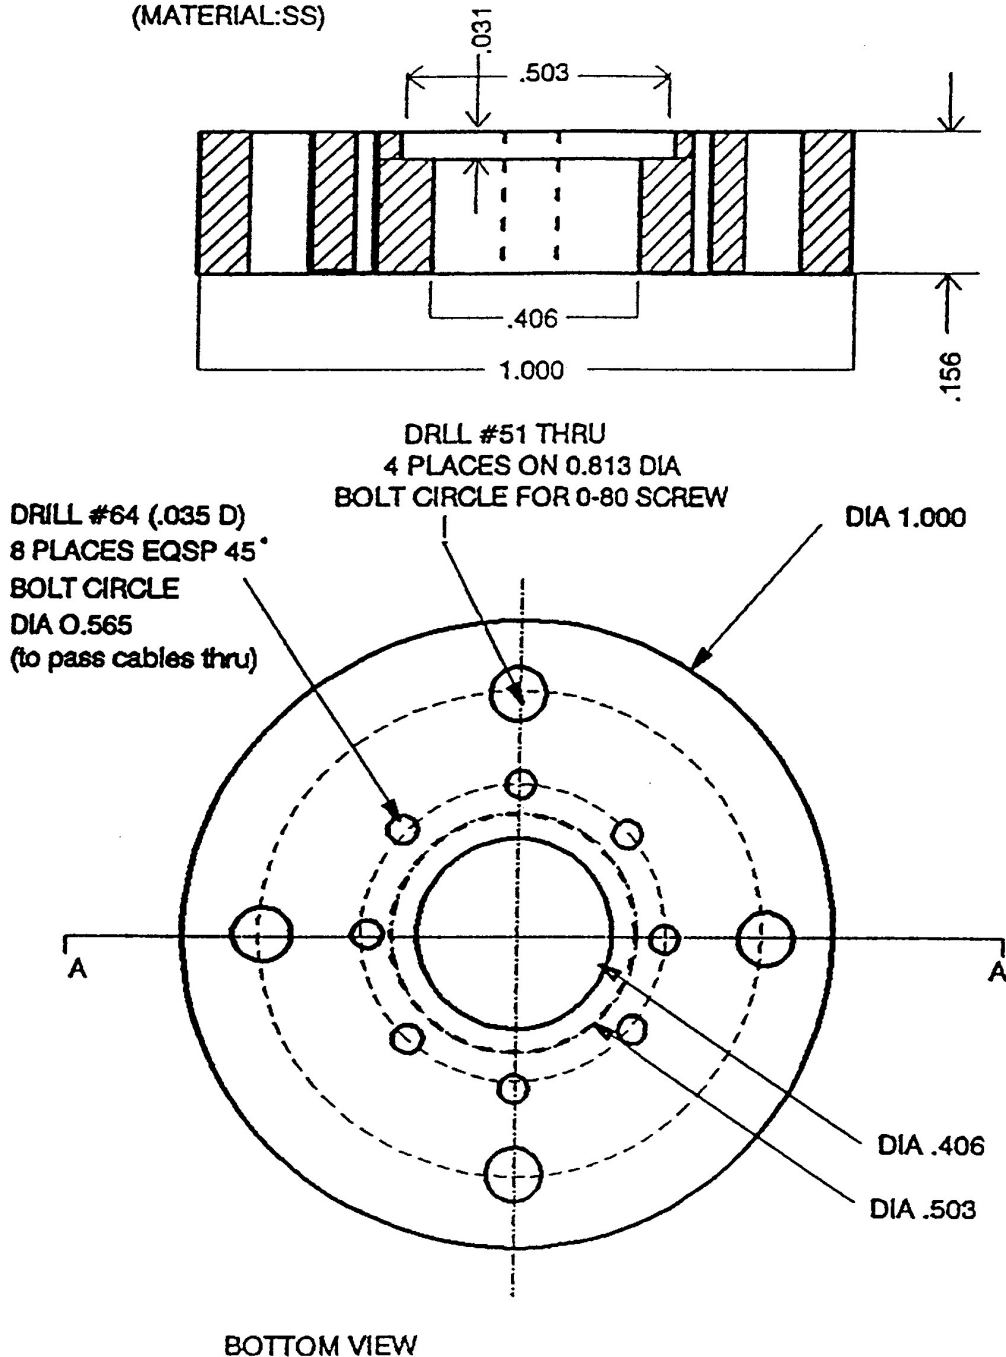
Scan piezo mounting (bottom) flange, number (I) in Figure B.3. This is the base plate for the piezo, which is epoxied on top of it. This flange is screwed into the bottom base plate.
